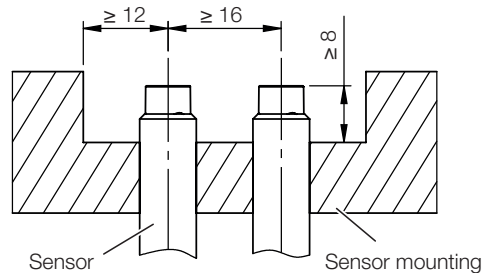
Clearances and minimum distances of non-flush-mount sensors
